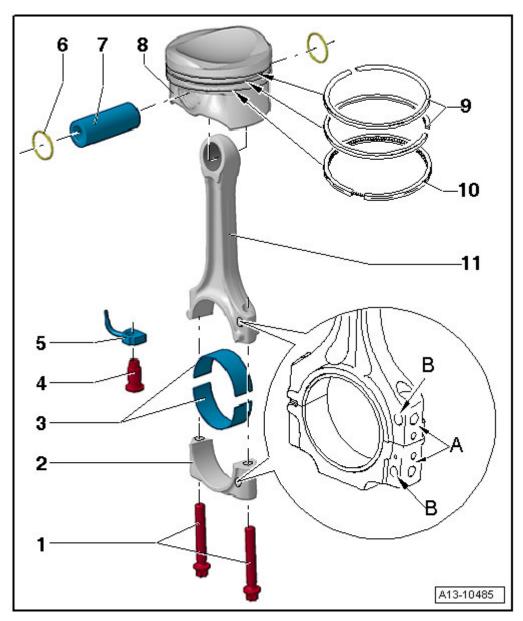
Identifying Assembly Overview: Pistons And Connecting Rod Courtesy of AUDI OF AMERICA, LLC
